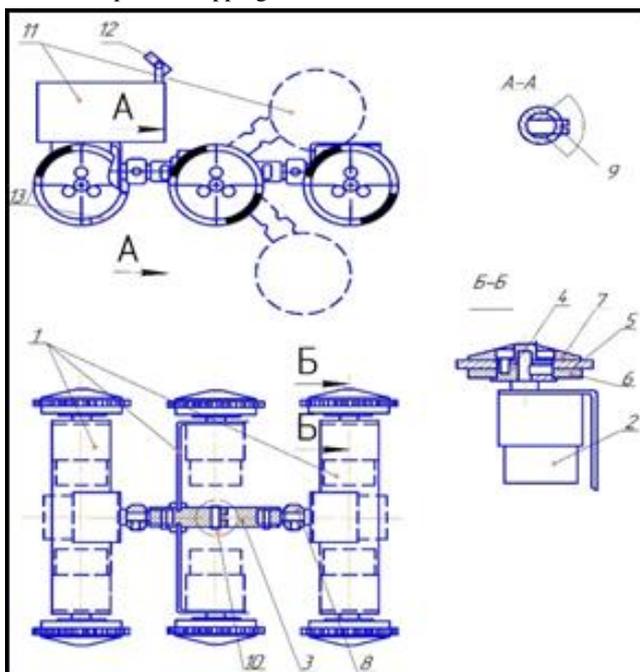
A platform for a magnetic-wheeled pipe flaw detector, where: 1 - chassis; 2 – a gear motor; 3 - longitudinal axis; 4 - an intermediate bush; 5 – a wheel; 6 – a ring magnet; 7 – a non-magnetic plate; 8 – a bush; 9 – a stop; 10 – a transverse joint; 11 – the technique of the trolley; 12 – a video camera; 13 - non-magnetic inserts.
